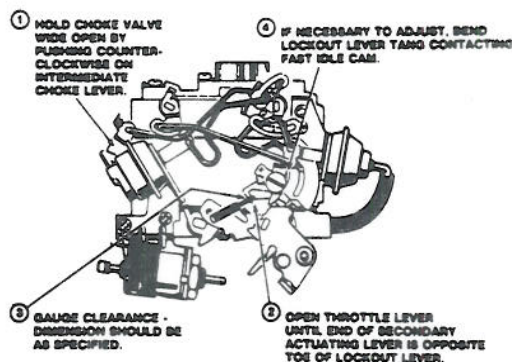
Secondary lockout adjustment (Typical). 2SE & E2SE carburetor
